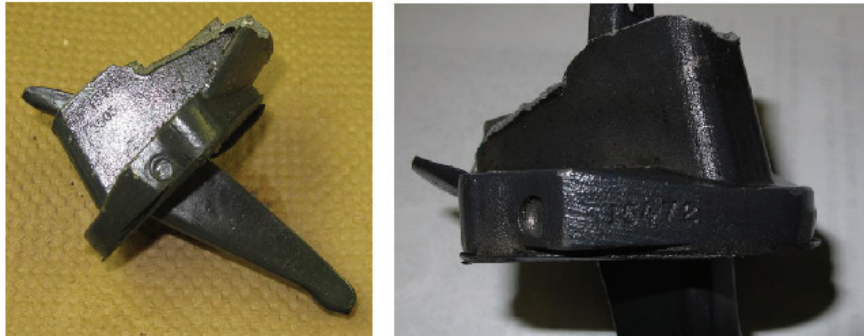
Piece of Fuel Pump, Different Part Number Stamps
